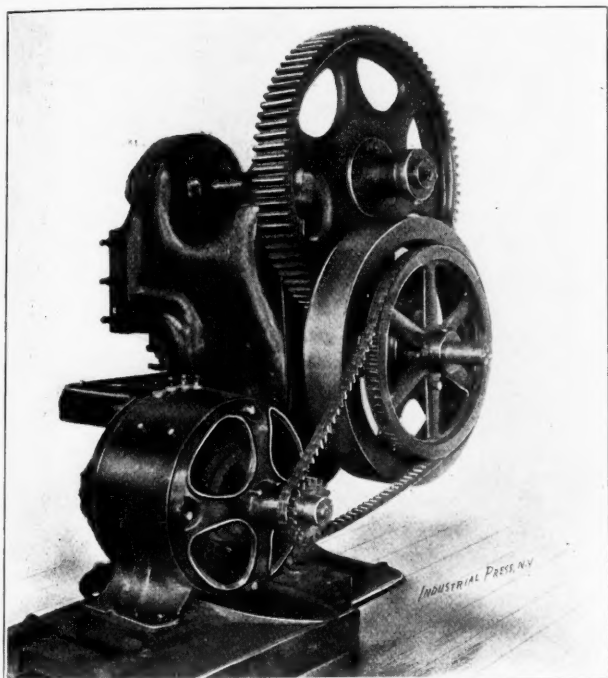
Ferracute Punch, Motor Driven, Renold Chain.
